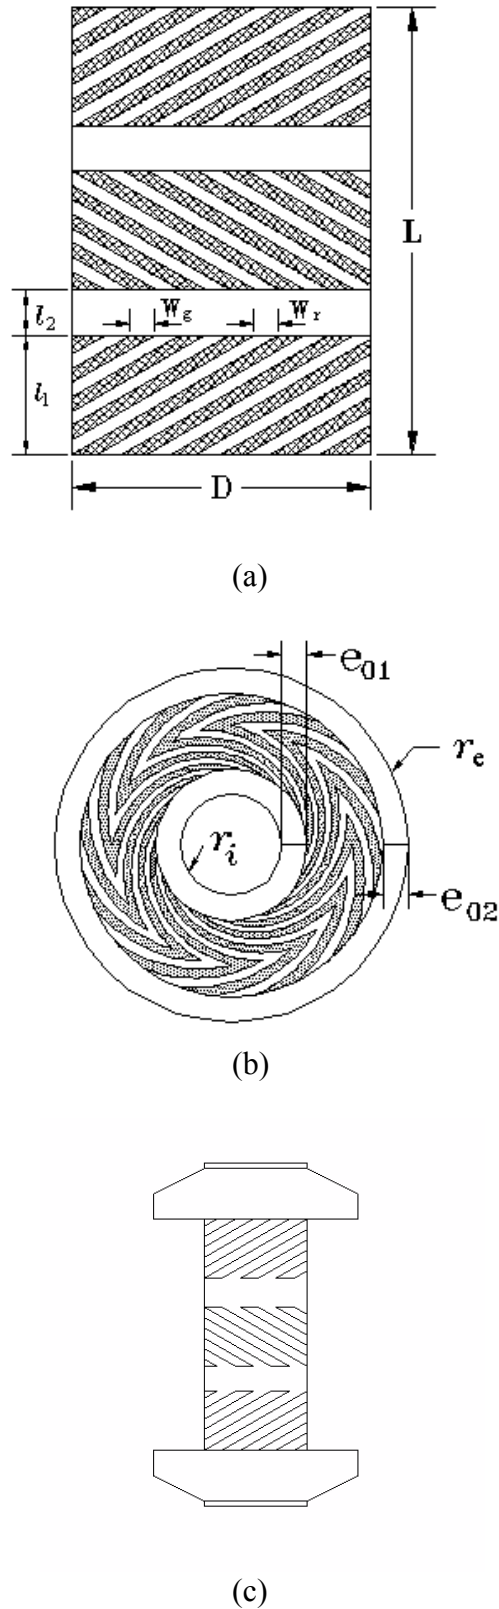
Schematic of groove arrangement on journal bearing (a), thrust bearing (b) and assembly (c) of journal bearing and thrust bearing.
